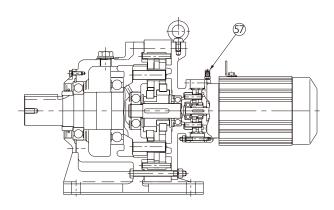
Type CHHM (Horizontal, Gearmotor), 2 Stage Reduction (Example: Frame size 6185DA)
